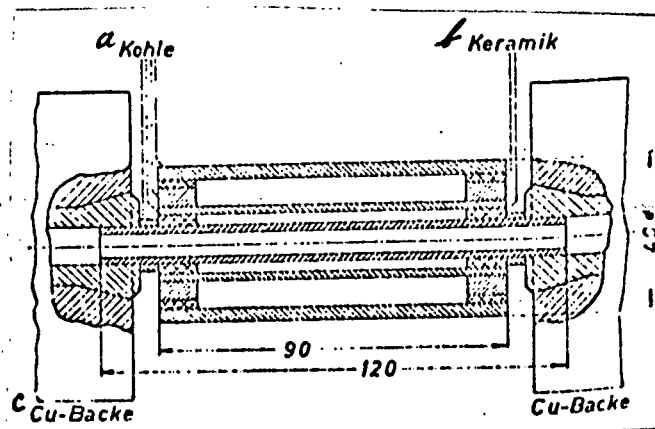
Cross sectional view of a radiator with two protective tubes (dimensions in mm).
